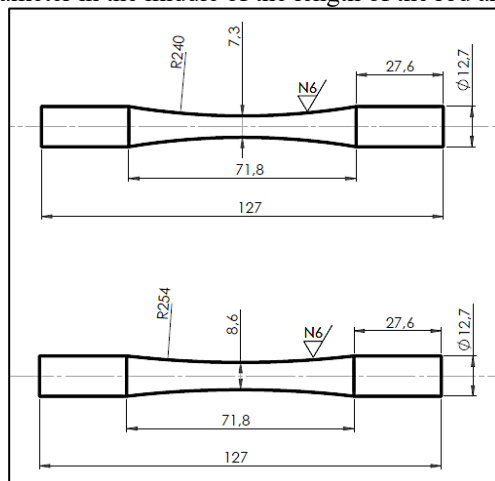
Shape and dimensions of standard fatigue test specimens with 2 kinds of radius on 254 mm and 240 mm
